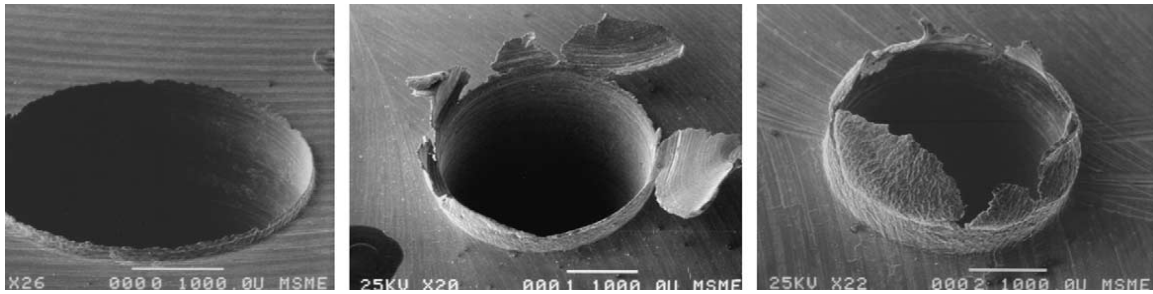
Three types of drilling burr of AISI 4118 (a) Uniform burr with a drill cap; (b) transient burr; (c) crown burr [18]
